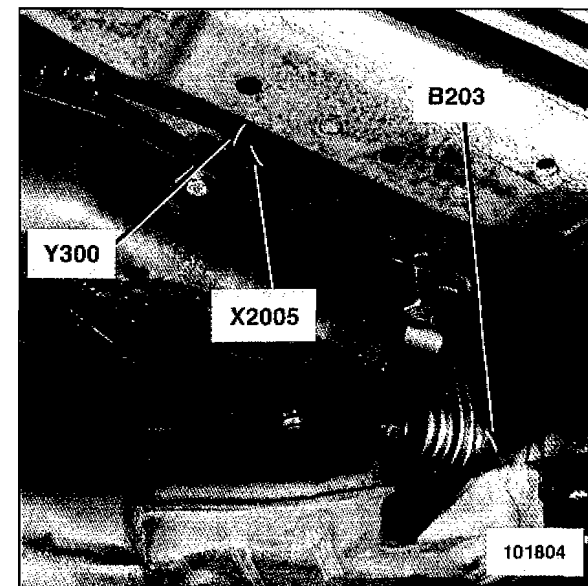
On LH Side Of Transmission (735i/735iL Shown, 750iL Similar)
